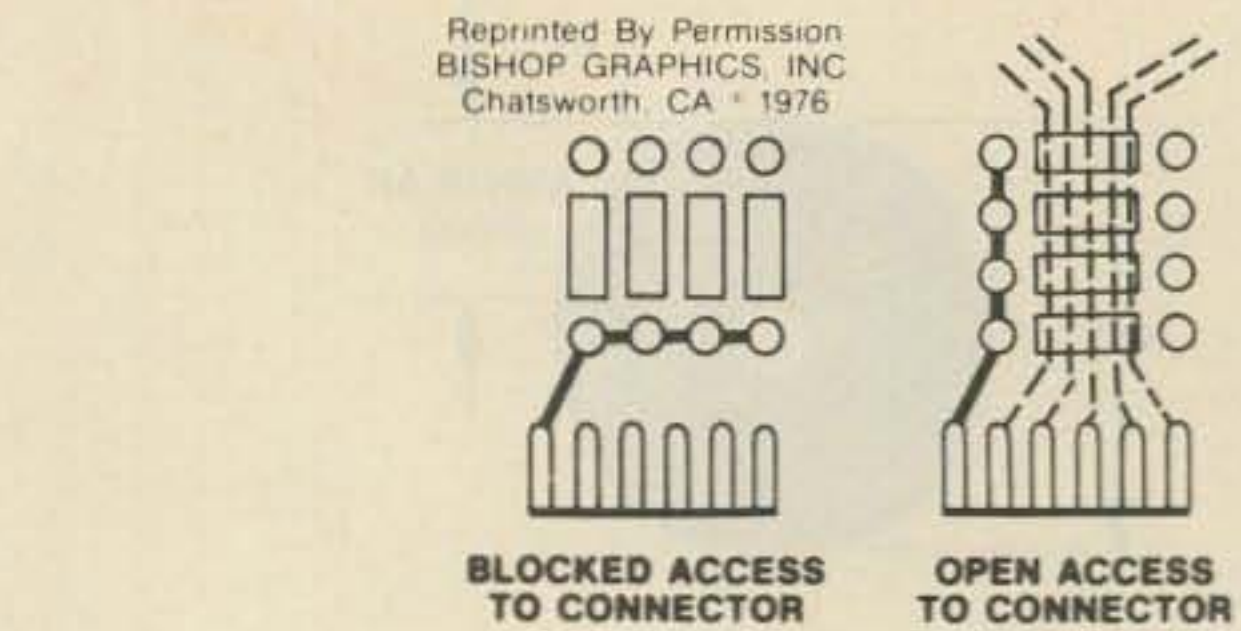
Arranging parts to provide maximum access to other components or edge connectors.
